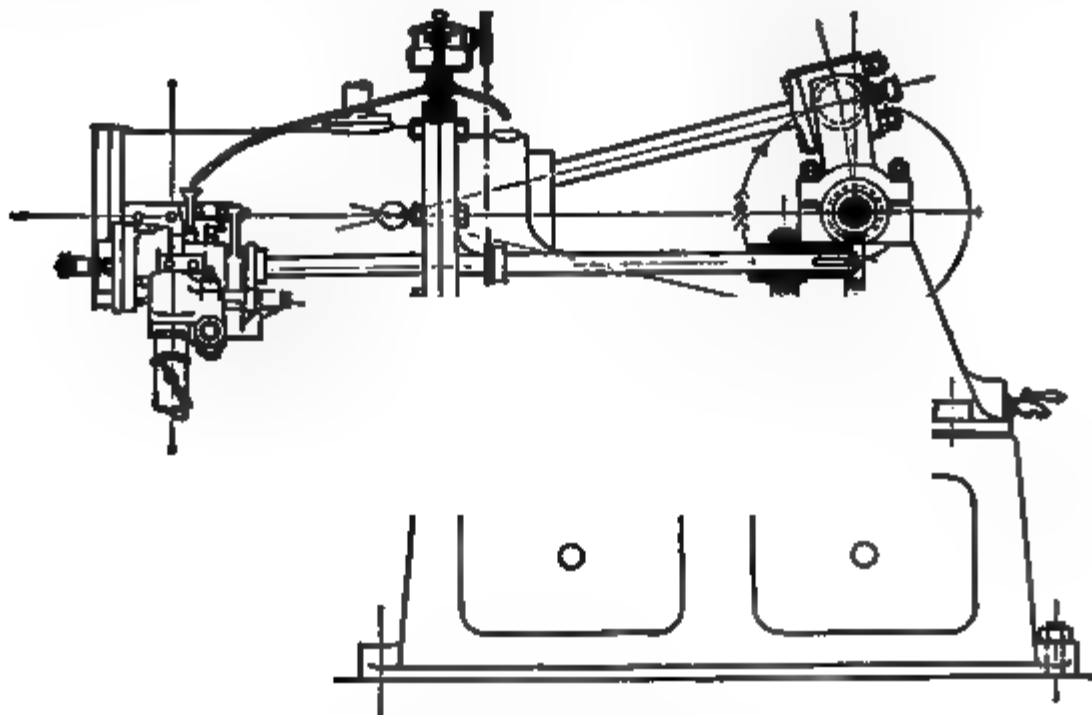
Niel Gas Engine—Sectional Plan. 1889.
